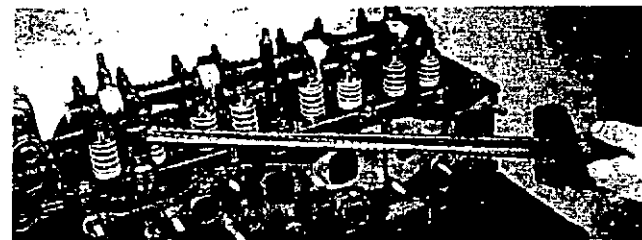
Tightening Cylinder Head Nuts with Torque Wrench
